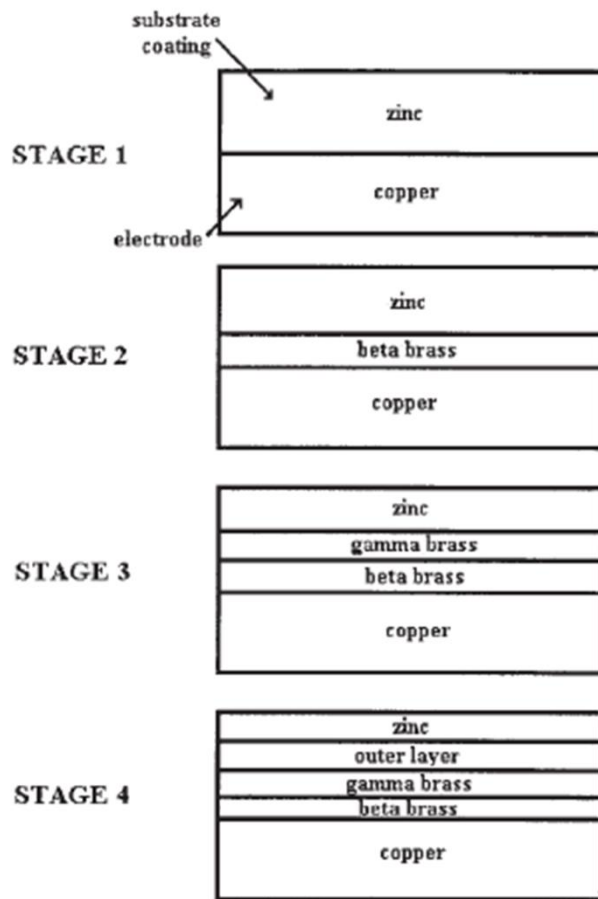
Schematic illustration of alloy formation during welding of galvanized steel [5]
